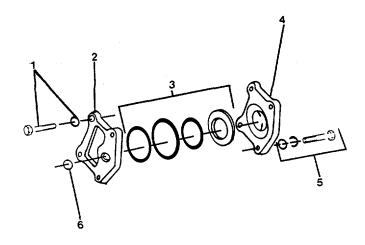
Fuel Pump Fluid Pressure Dampener.
